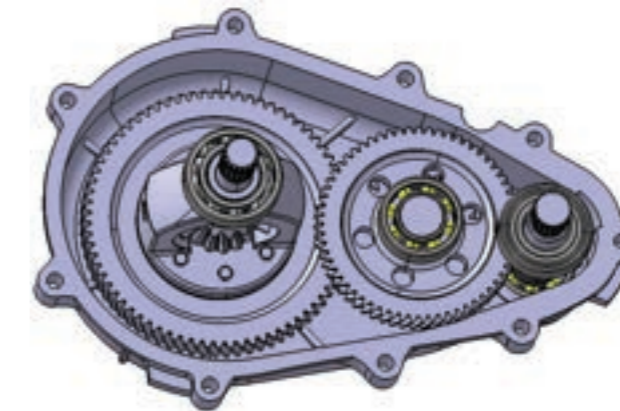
Renault Twizy Gearbox without upper cover as CAD-Model
